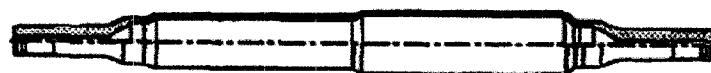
Hydraulic expansion formed tube shaft with swaged ends. P. Amborn, S.K. Ghosh and I.K. Leadbetter (1997) [3]
